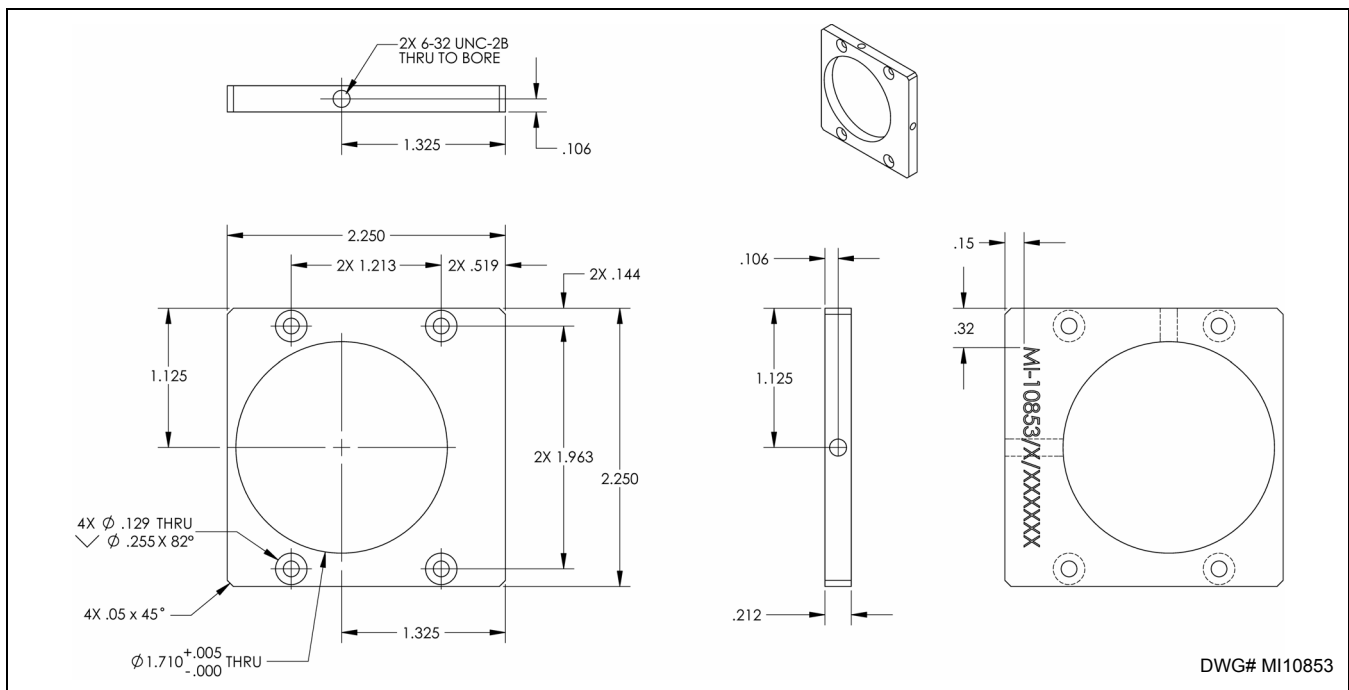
Mounting Assembly for the LNIR-20-20 Filter
